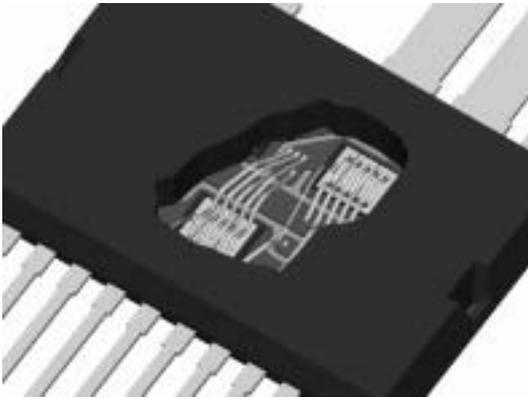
enlarged cut-off view of proposed GWM160-0055P3 component
